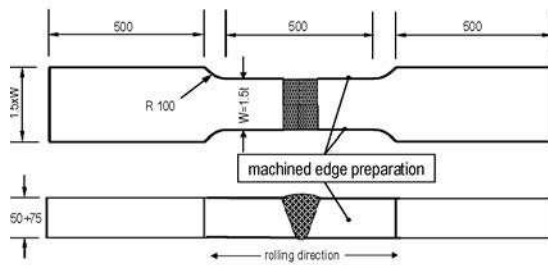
Butt weld specimens (thickness range between 50 and 75 mm)
